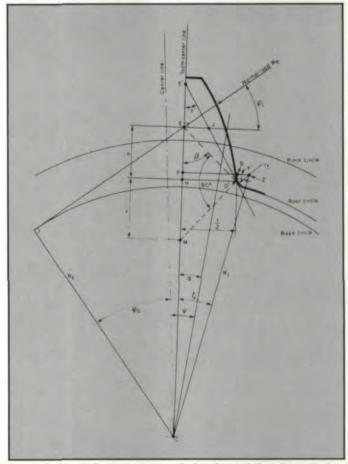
Geometrical construction to calculate the tooth form factor Y of an involute spur gear (AGMA 226.01)
